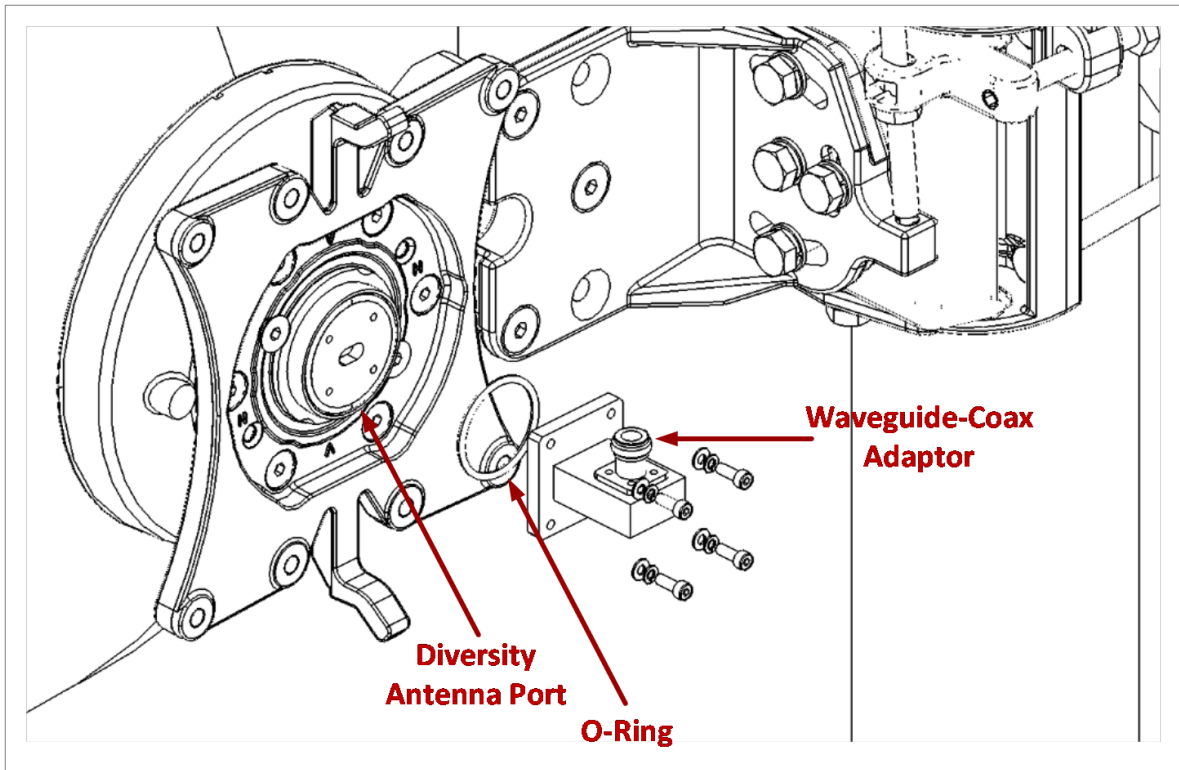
LDF4 Cable to Remote Mount Adaptor – 1+1/2+2
